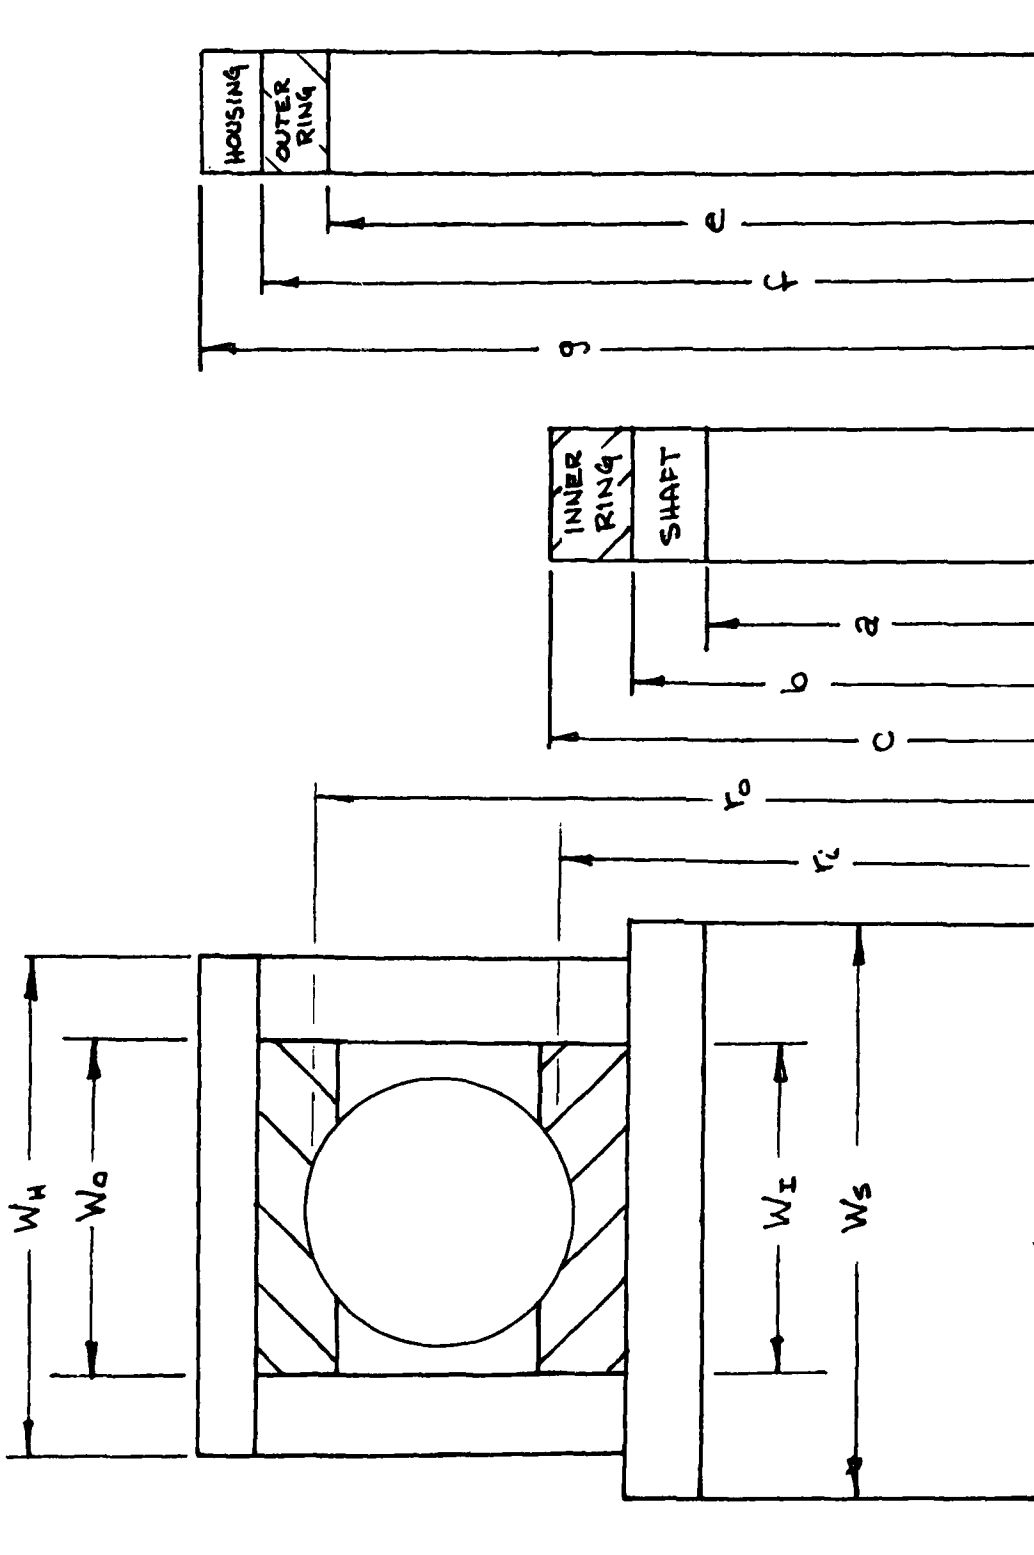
BEARING ASSEMBLY EQUIVALENT SECTIONS
